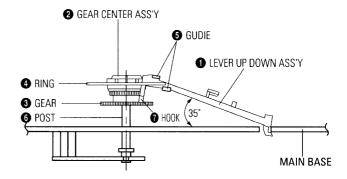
Assembly of Lever Up Down Ass'y, Gear Center Ass'y
